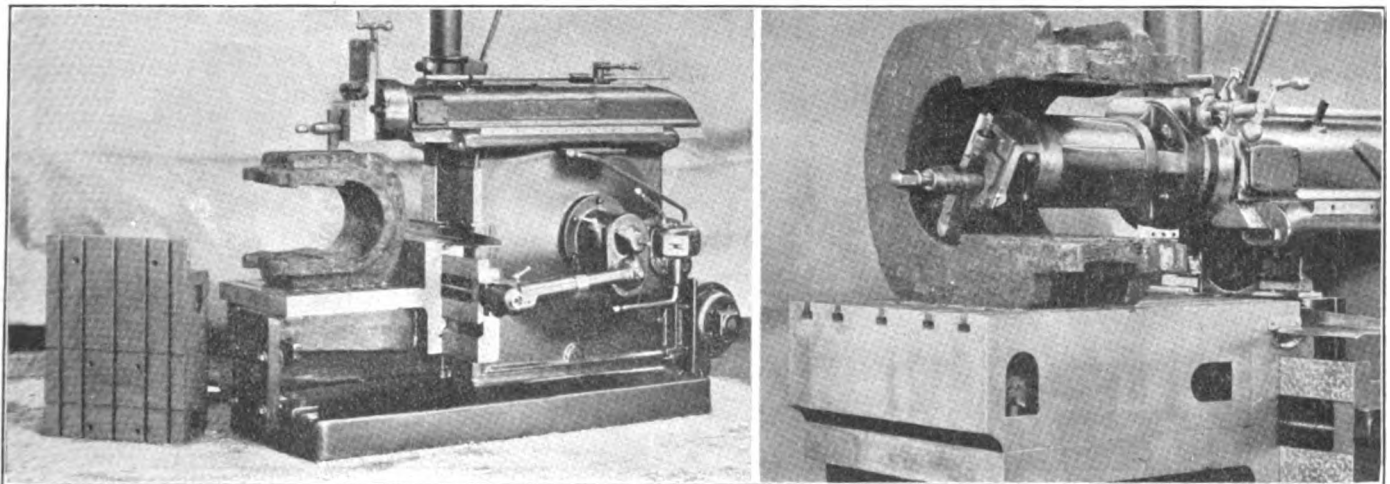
The view at the left shows the shaper set up for machining the shoe and wedge fit of a driving box with the special table on the floor—The right view shows the special table on the shaper with a driving box set up for machining the crown brass
